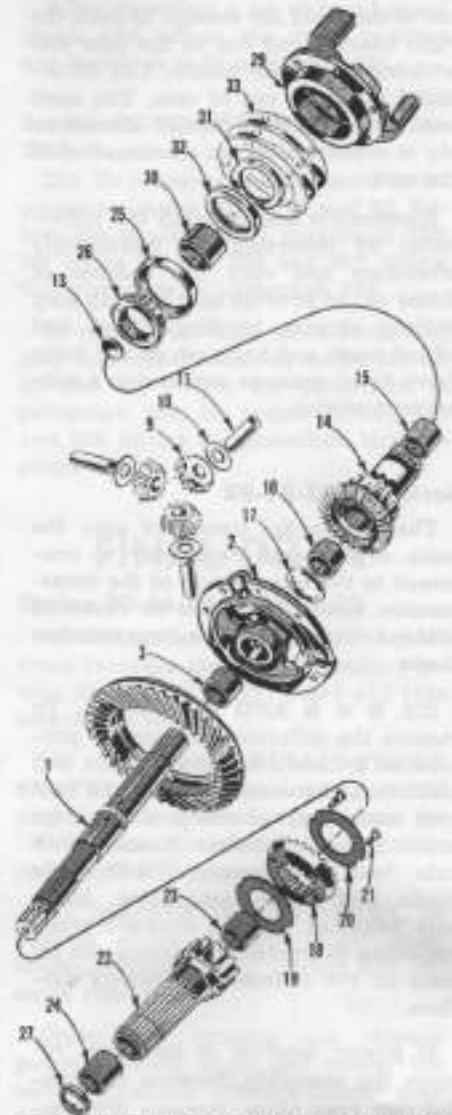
Exploded view of differential as used on 44 series tractors when equipped with continuous (live) power take-off.
